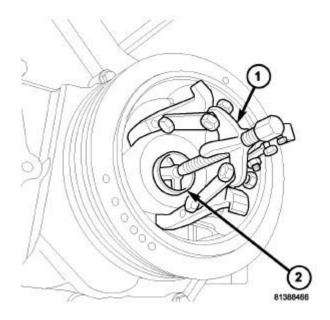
CRANKSHAFT DAMPER REMOVAL Courtesy of CHRYSLER LLC
